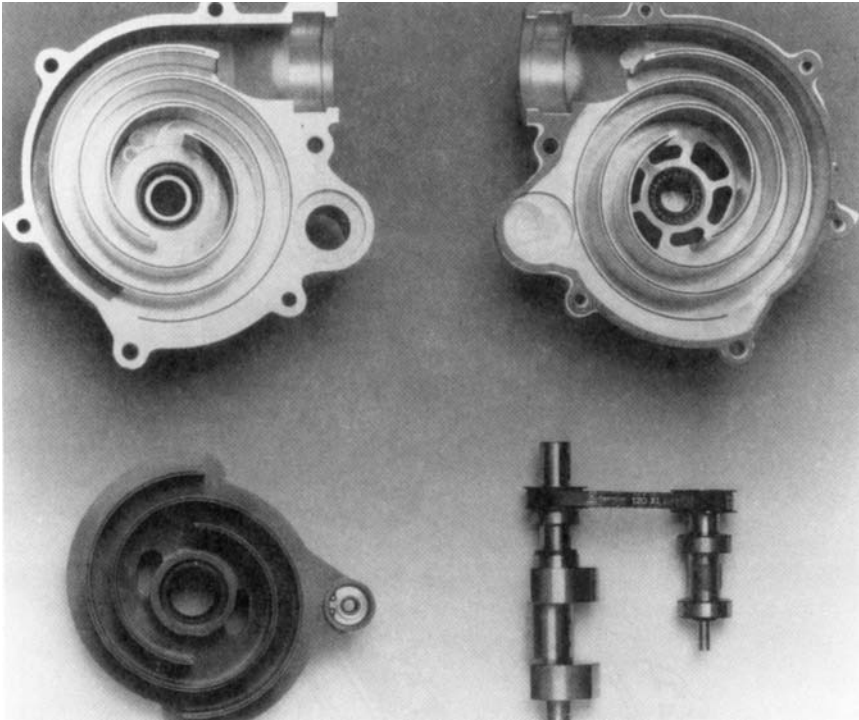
Key components of the G-lader supercharger. At the top are the two halves of the housing with the fixed G-shaped spiral chambers. In the lower left is the G-shaped rotating element that mates with the spiral in the housing. The shaft element that provides the oscillating motion is shown in the right corner. (Courtesy Volkswagen AG.)
